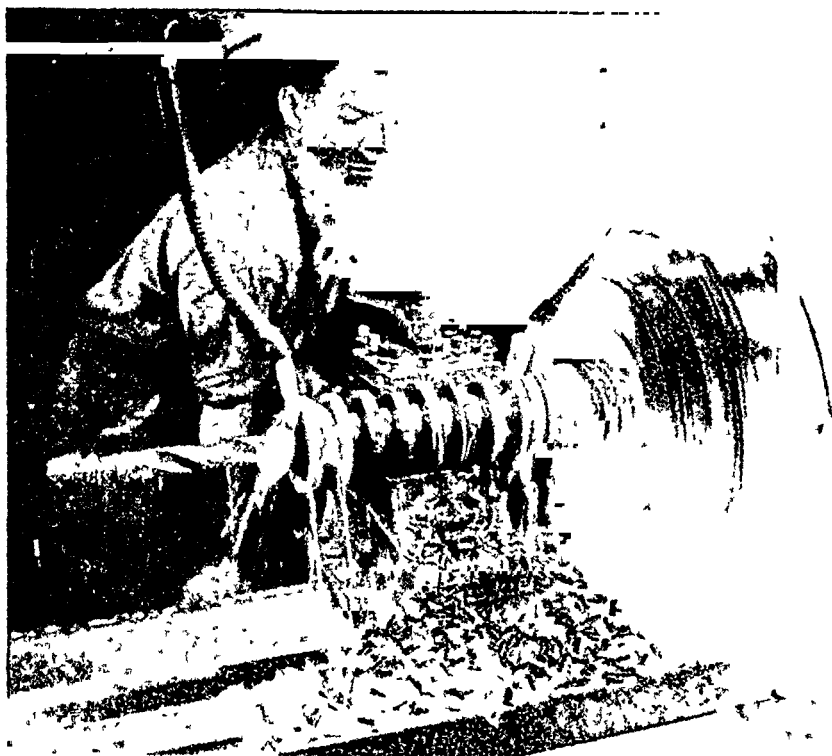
Turning Gear blanks being cut from a solid bar of steel on a lathe. When finished, the eight blanks shown in process are cut apart and sent to a milling machine, which cuts the teeth into the blanks.
